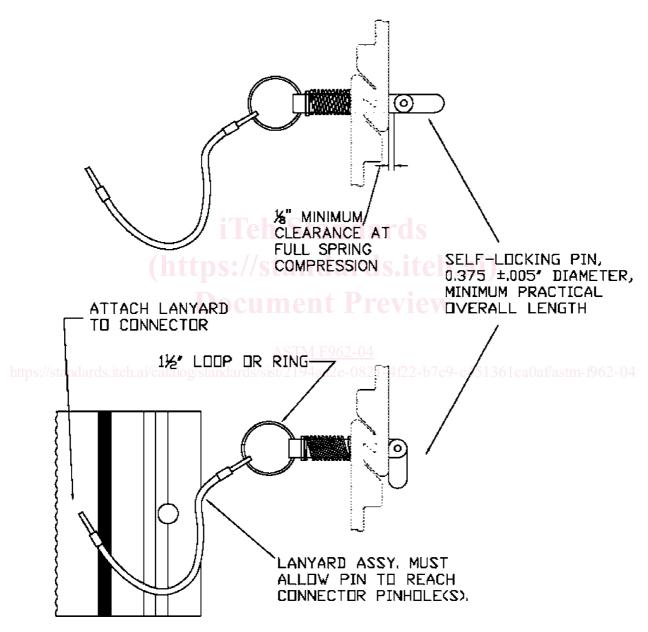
Self Locking Cross Pin / Lanyard Assembly
